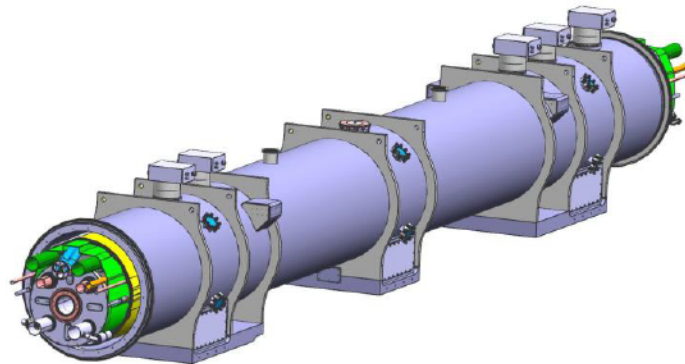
Isometric view of a complete LQXFA/LQXFB Cryo-Assembly.
